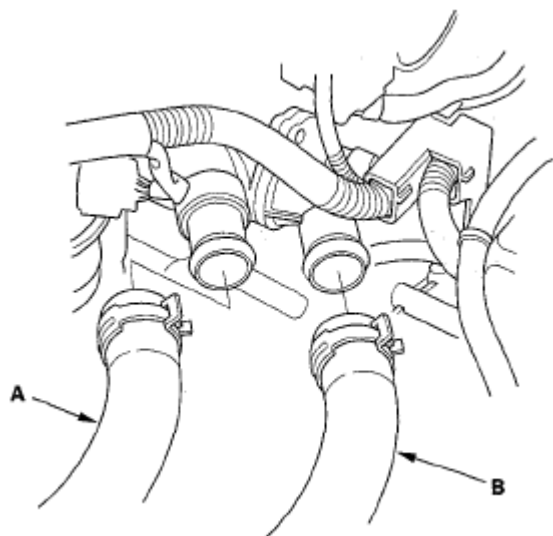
Identifying Upper Radiator Hose And Lower Radiator Hose
